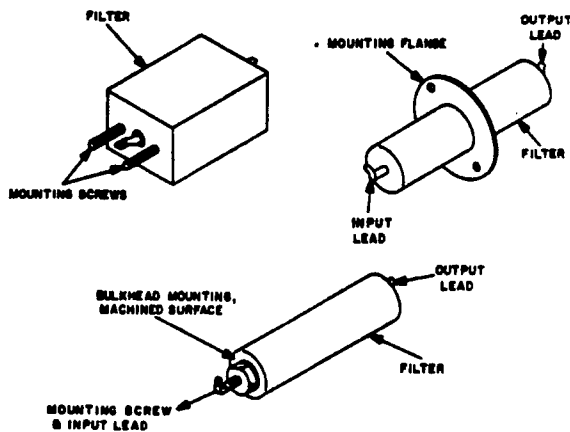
Typical Feed Through Filters for Bulkhead Mounting
